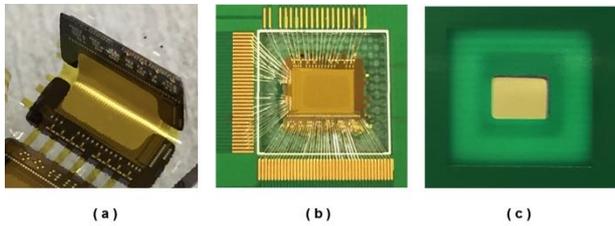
(a) bendable chip released after substrate etching; (b) front-side of flexible chip mounted onto PCB; (c) back-side of flexible chip mounted onto PCB;
